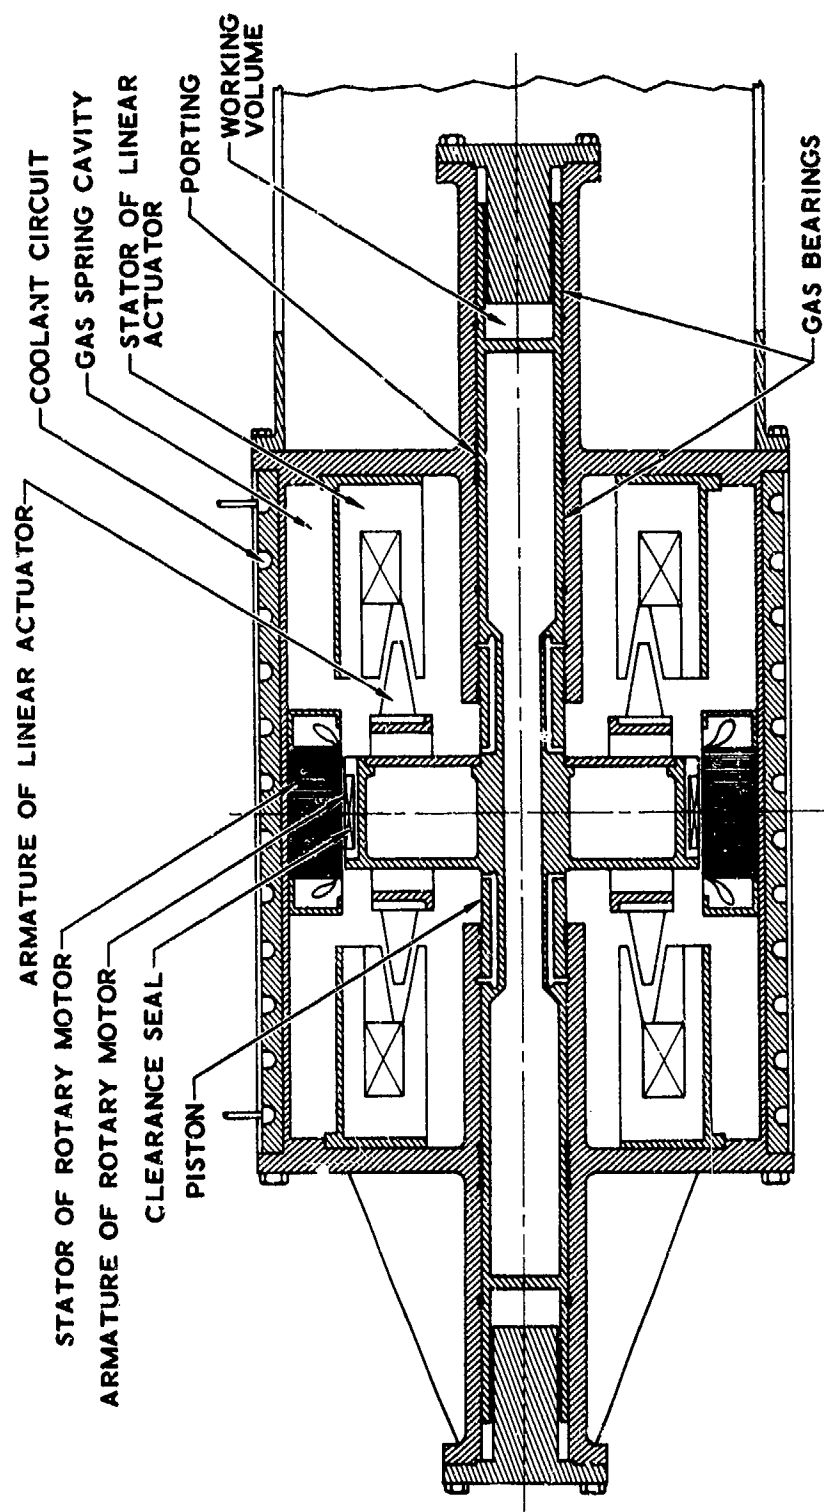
Rotary-Reciprocating Refrigerator, Cross-Section of Compressor (Ref. 27)
